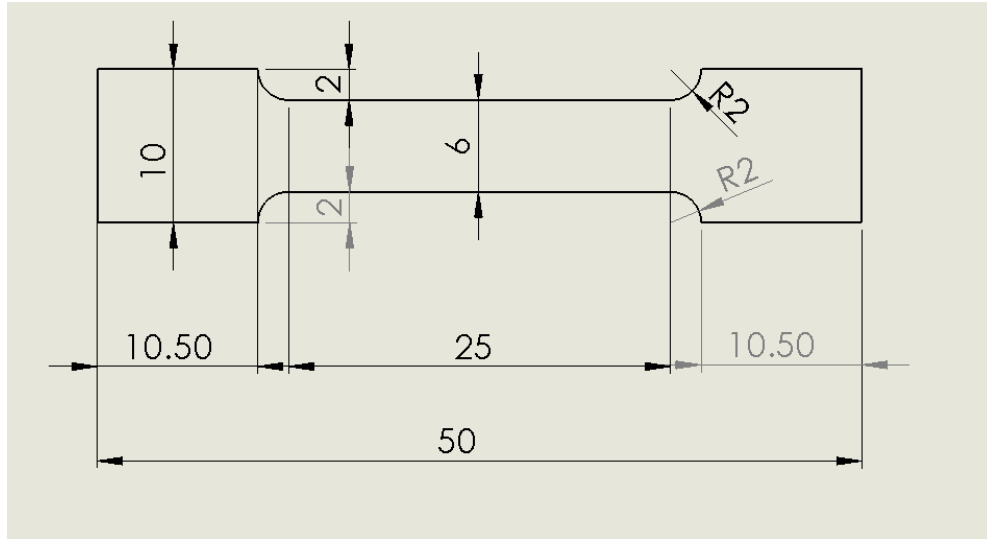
Schematic drawing of flat dog bone shape tensile specimens.
